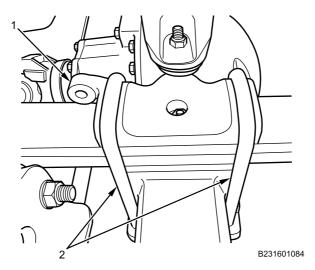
Front Shock Absorber Lower Mounting Bracket Installation.
